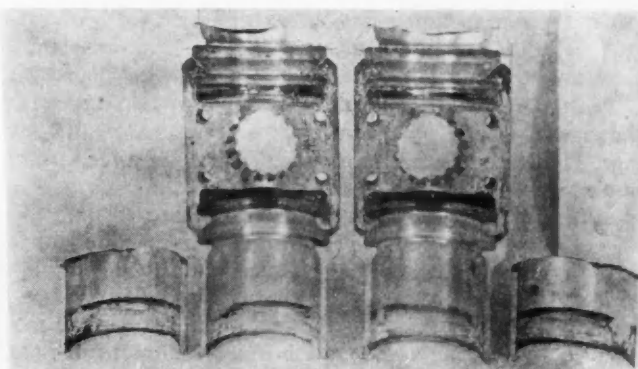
Failure of a Second Type of Hub on the Testing Machine
